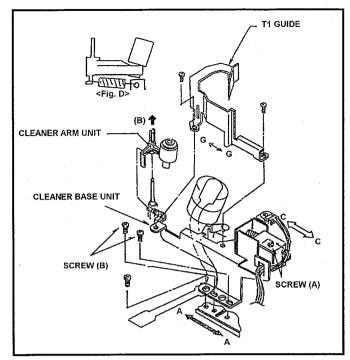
Cleaner Solenoid Position Adjustment
